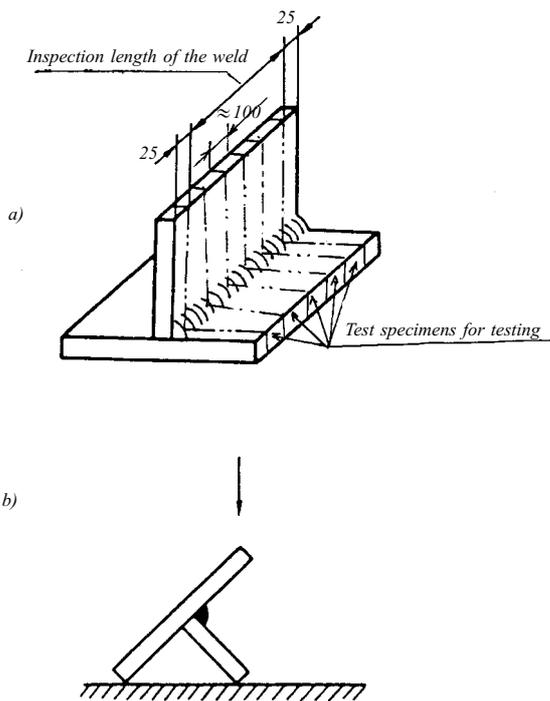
Diagram of cutting-out (a) and test specimens from the test piece P₂ of the T-joint for weld metal fracture testing (b)
